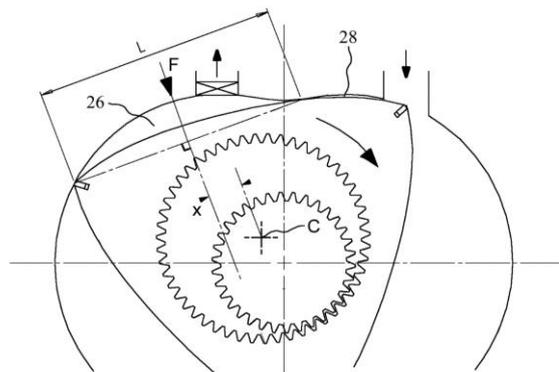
Intermittent torque loading on the gears results from the uneven gas pressure on the rotor flank. Pressure in chamber 26 is higher than in 28 resulting in Force F producing a torque Fx about the centre C of the rotor
